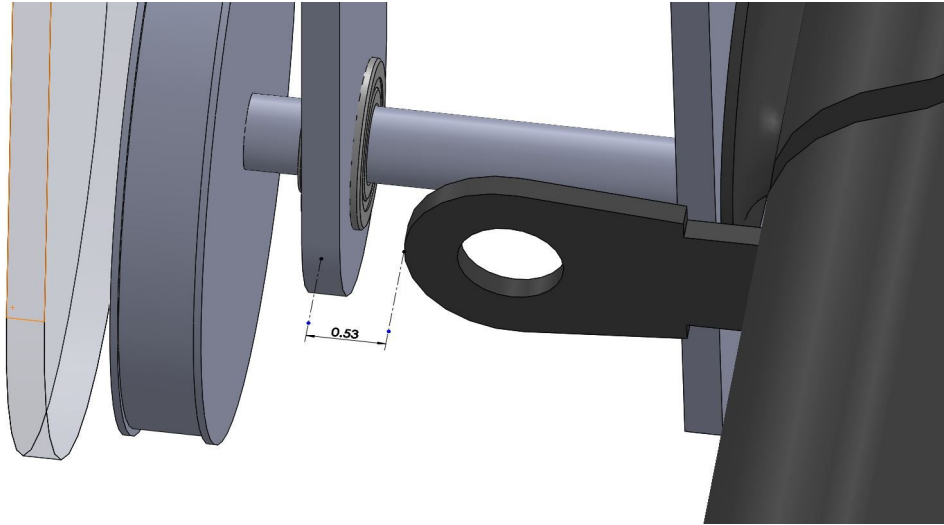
Clearance between the spotlight's shutter tab and bearing mount on the X shaft.
